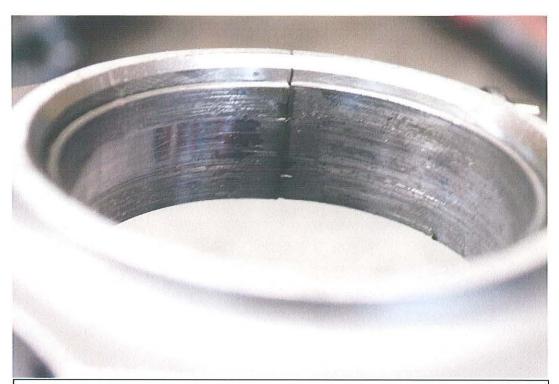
#377R: Indication of metal to metal contact on cylinder #2 connecting rod bearing (image cropped)
